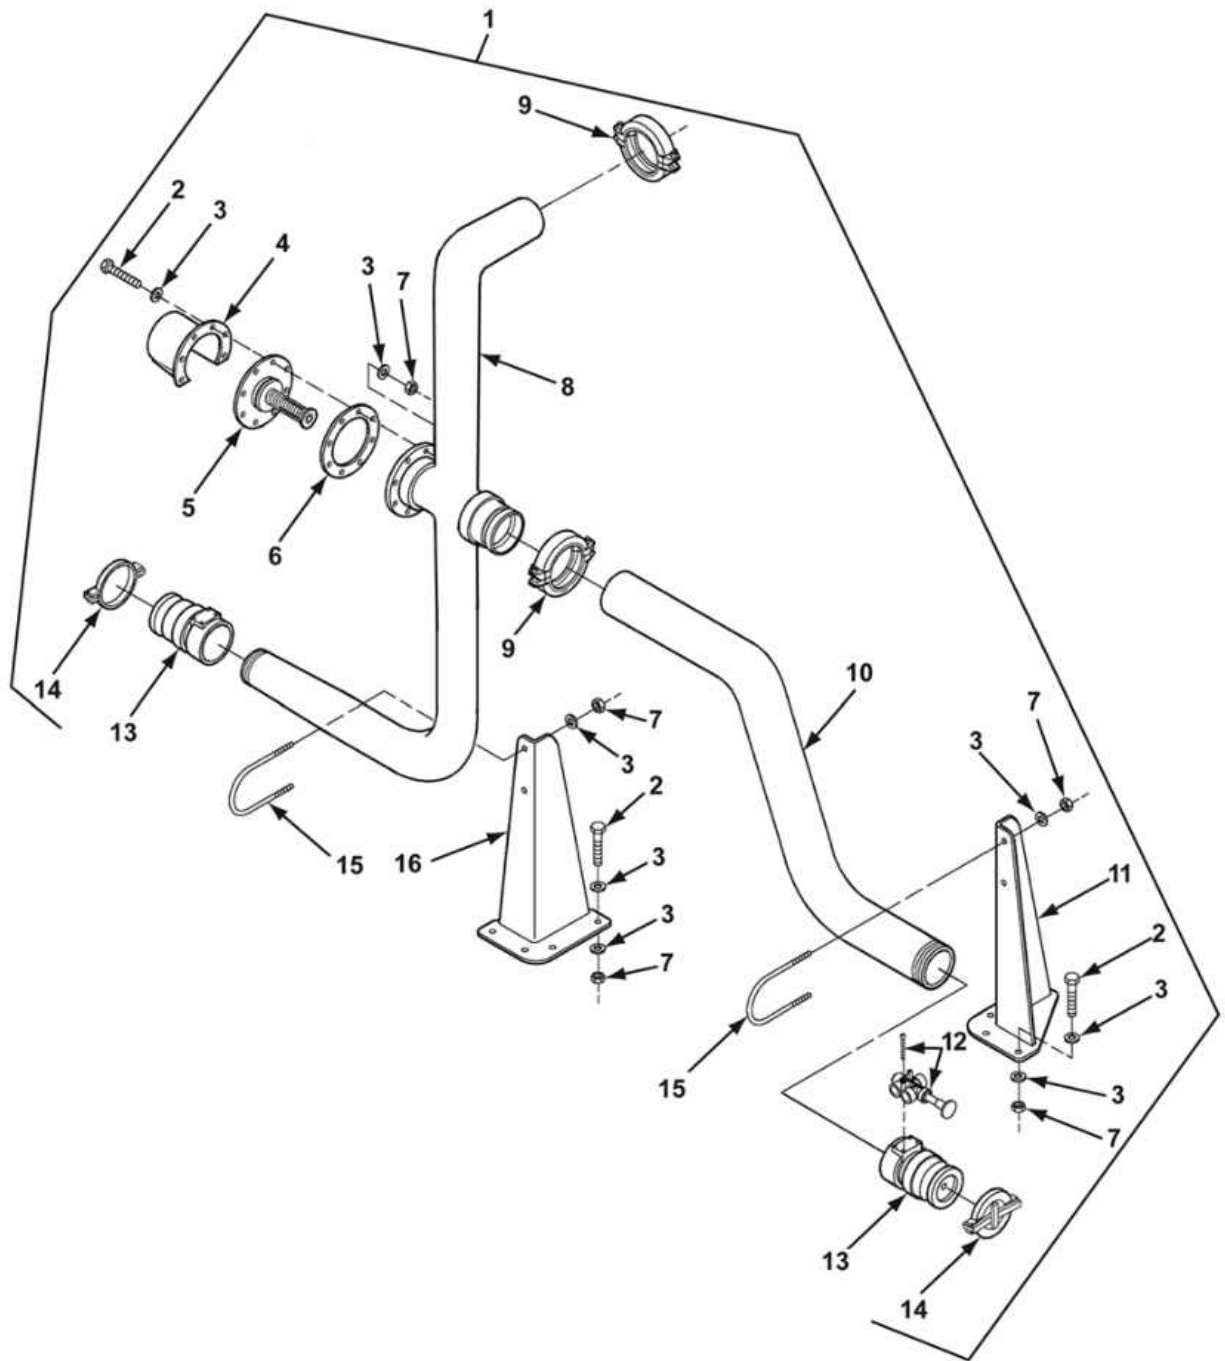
VAPOR RECOVERY ASSEMBLY
